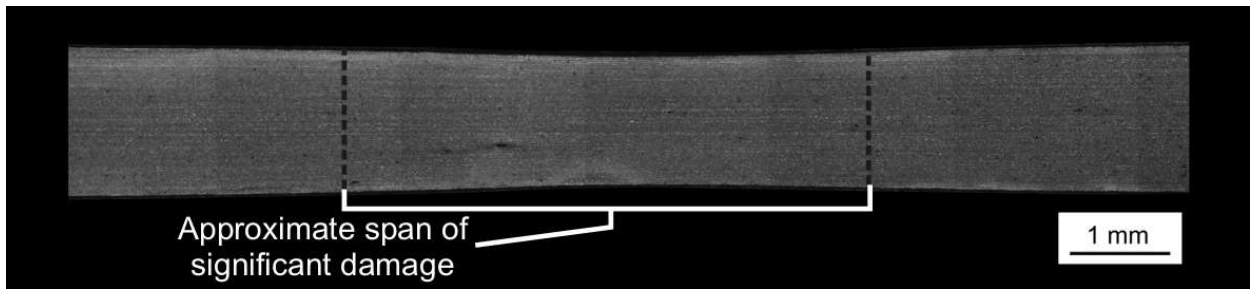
Longitudinal section from a partial fracture test of a TB87 welded sample that necked in the BM failure location.
